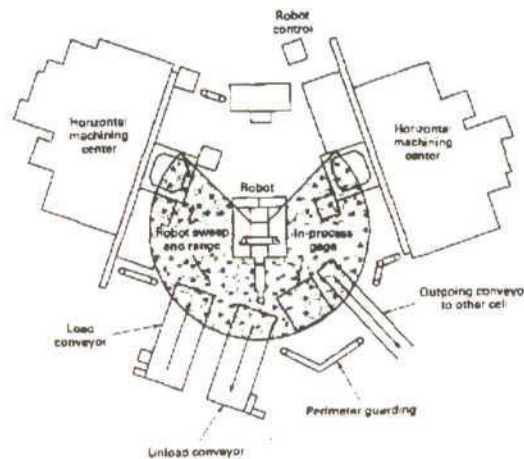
A robot interfaced to a machine tools and conveyors to load and unload incoming and outgoing work pieces in a machining center. [Luggen]
